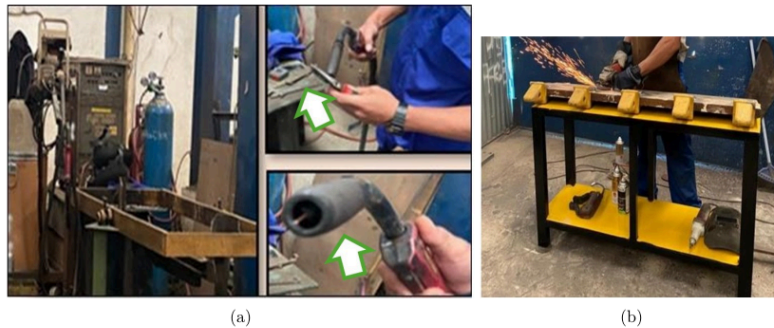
(a) Before: there is no cleaning welding tool; after: the proposed improvement is presented a routine cleaning for welding equipment; (b) Before: there is no work table and a place to put tools; after: finishing table Implementation
